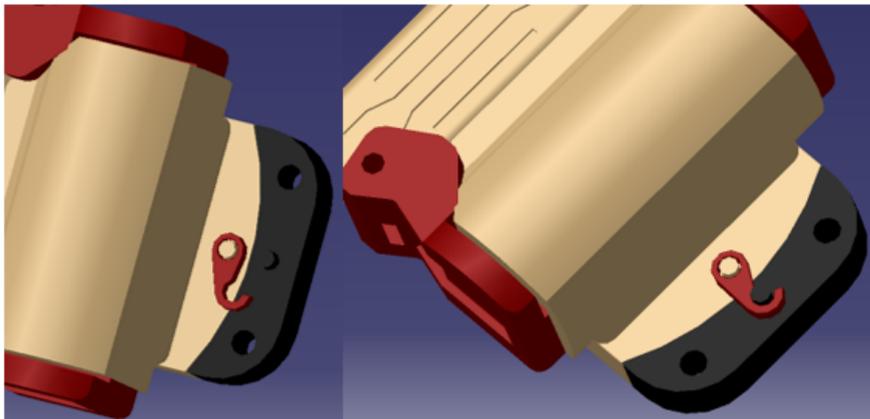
Final concept - Locking mechanism of modular toe piece
